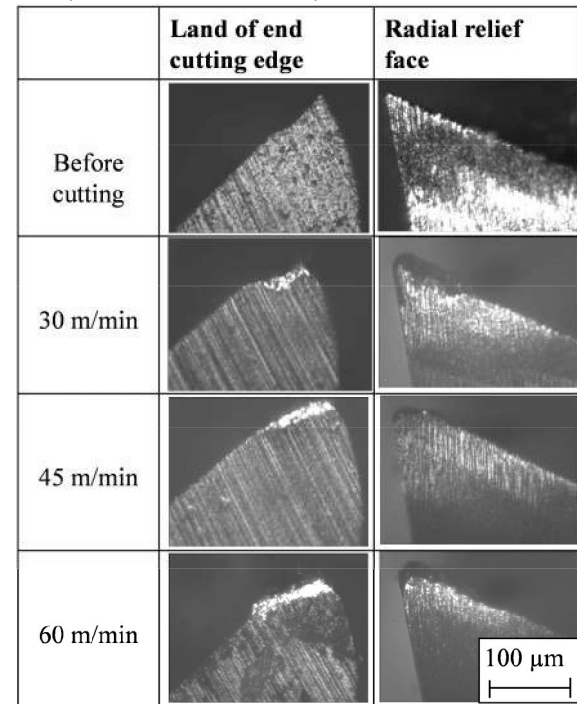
Observation of tool wear after cutting one groove (30mm) in each cutting speed
